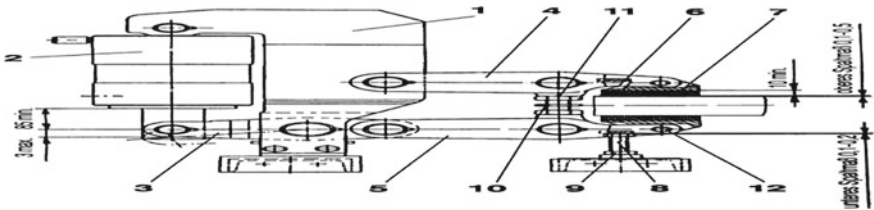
Brake assembly of MRCL 1. Mounting, 2. hydraulic cylinder, 3. intermediate lever, 4. upper brake lever, 5. lower brake lever, 6. brake shoe, 7. brake pad, 8. adjusting screw, 9. lock nut
